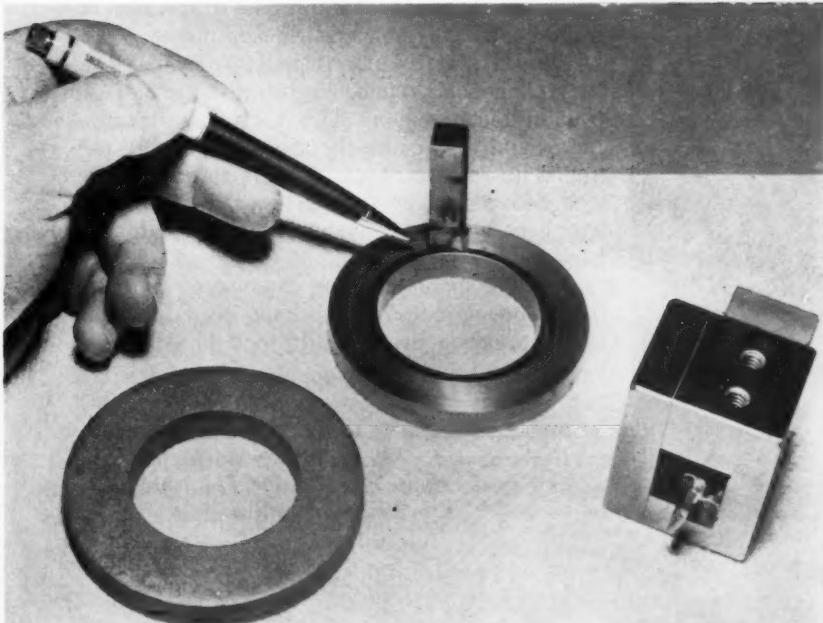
(Left) Rough compressor-valve plate, left, finished valve plate with grooving tool in recess, center, and cartridge type tool-holder, right. Pads are placed between clamp screws and tool shank.
